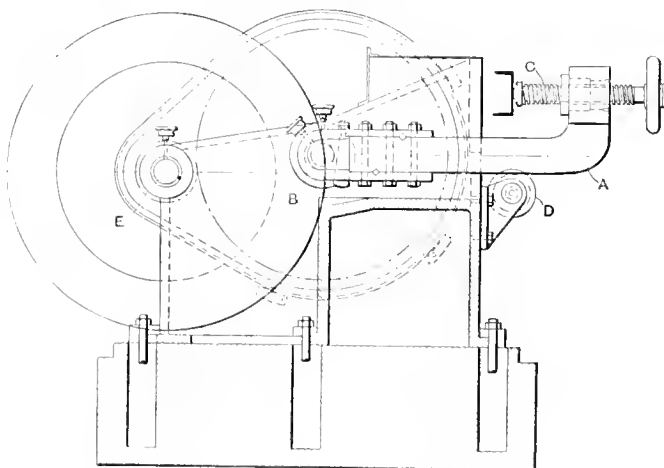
The Power-driven Bending and Straightening Machine forming an Angle-iron
